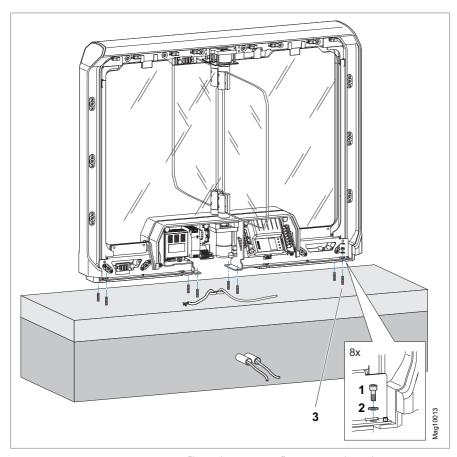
Mounting version "base plate mounting" – Mounting the pedestrian gate
